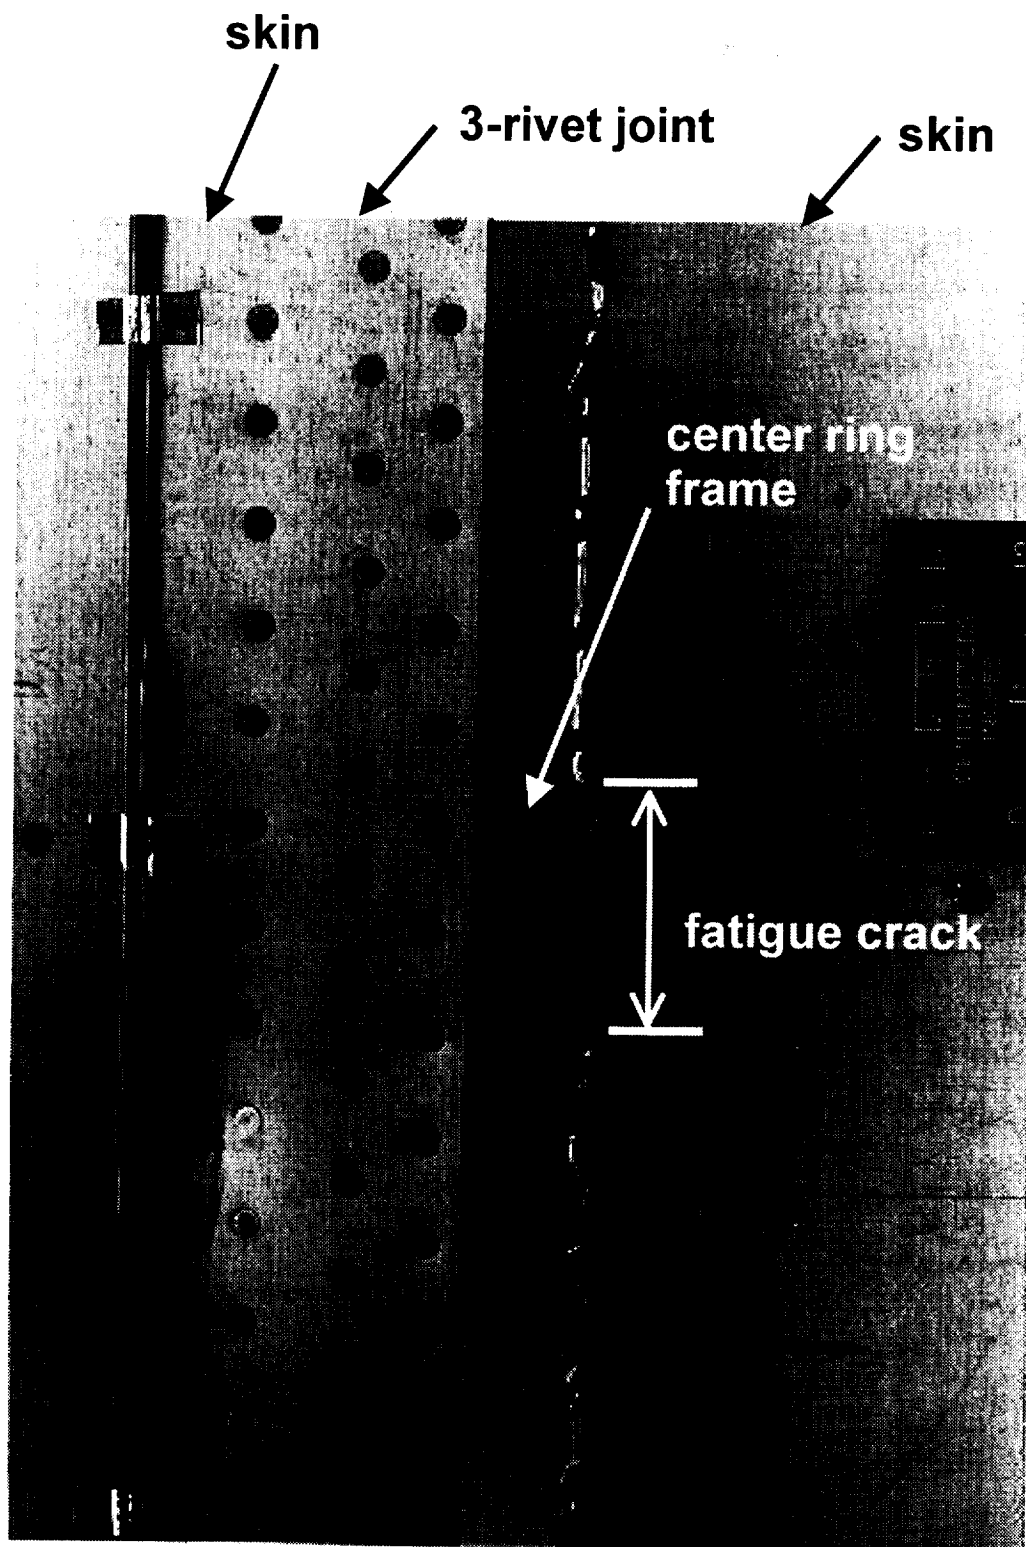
Detailed view of a fatigue crack in the ruptured fuselage panel (exterior view).
